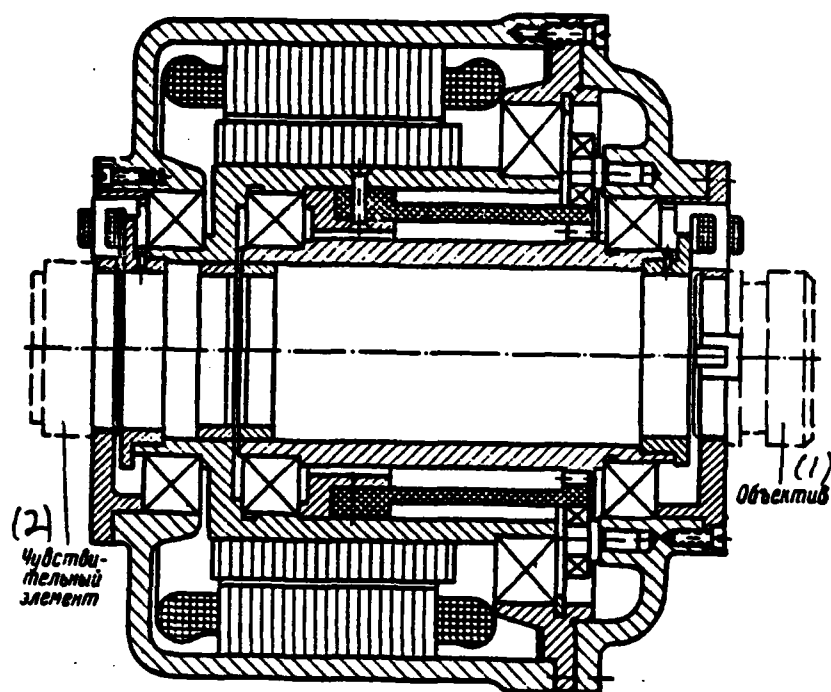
Optical-mechanical scanning device/equipment with the flexible drive and with two diaphragms with the figure gashes.
